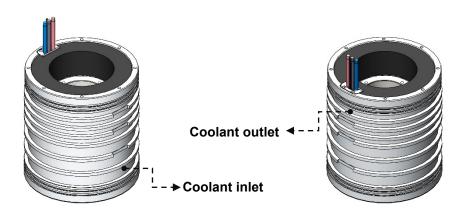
The recommended locations for coolant inlet and outlet
